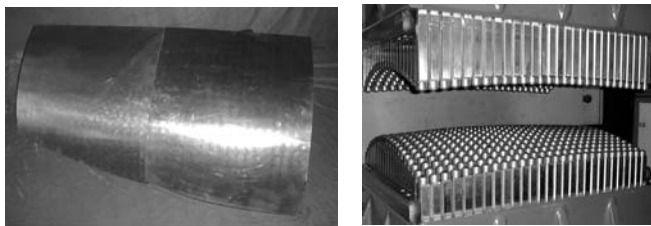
Sheet metal part formed by digitized-die ( $28 \times 20 \times 2$  punches)
